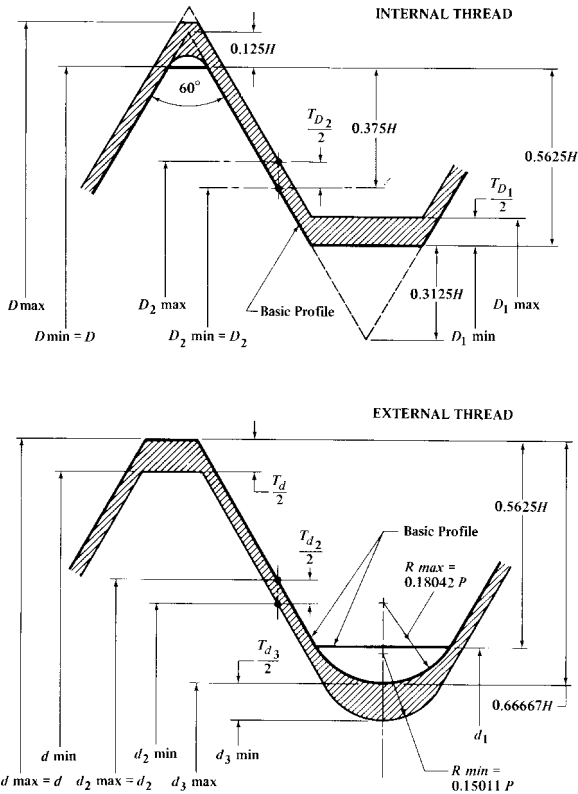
Internal MJ Thread Basic and Design Profiles (Top) and External MJ Thread Basic and Design Profiles (Bottom) Showing Tolerance Zones
